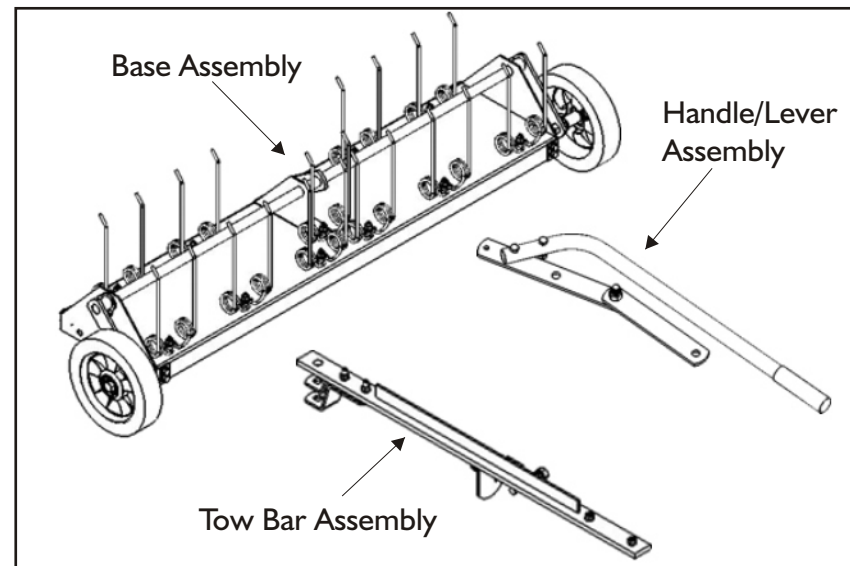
Remove the 5/16" Hex Head Nuts and 5/16" Lock Washers from the Center Plate. Slide the Tow Bar Assembly onto the bolts and then fasten with the Lock Washers and Hex Head Nuts.
